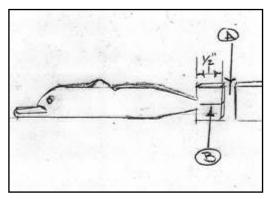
and 12: Take a good heat, open up the split, then shape the dolphin's tale.
